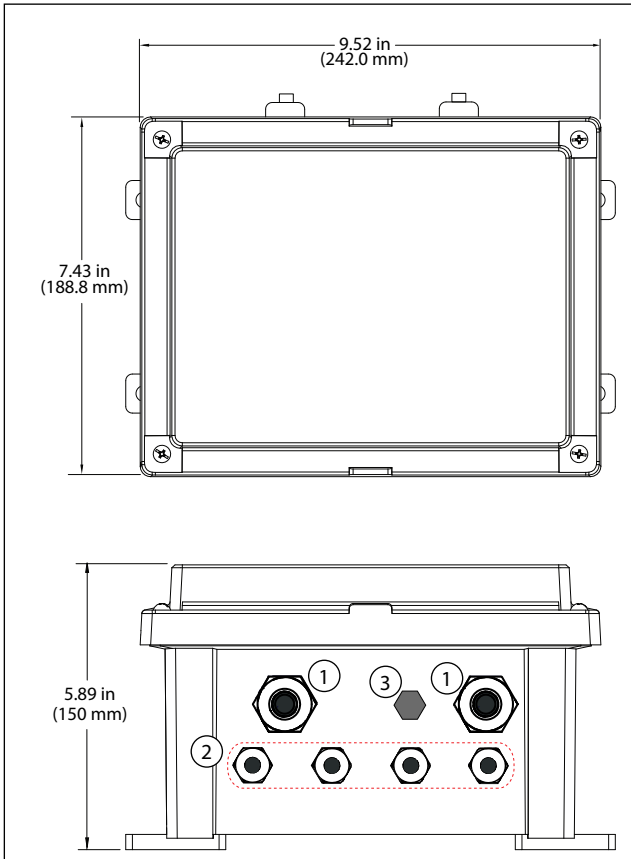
JB4EP and JP4SP Enclosure Dimensions
